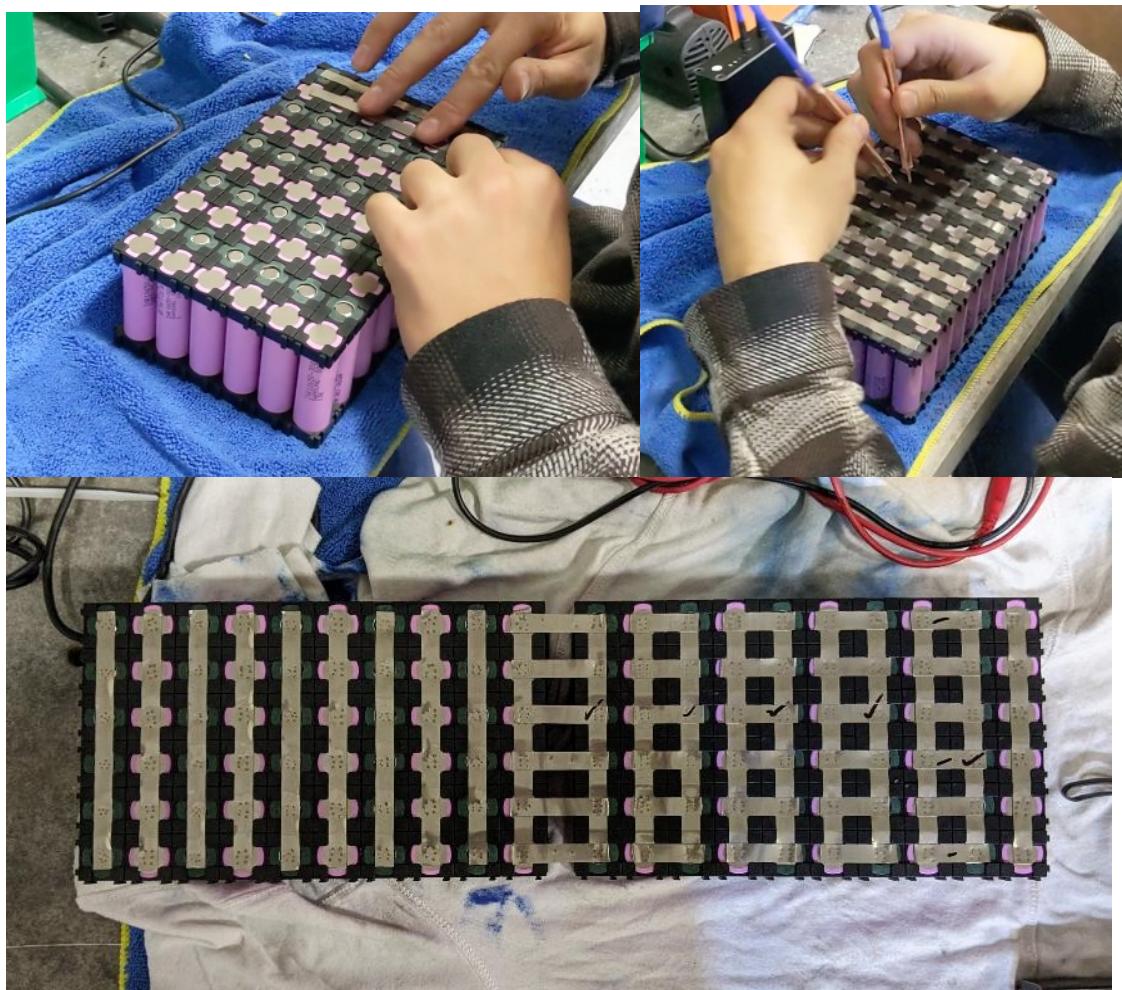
Pictures while spot welding the series and parallel connections to my battery
